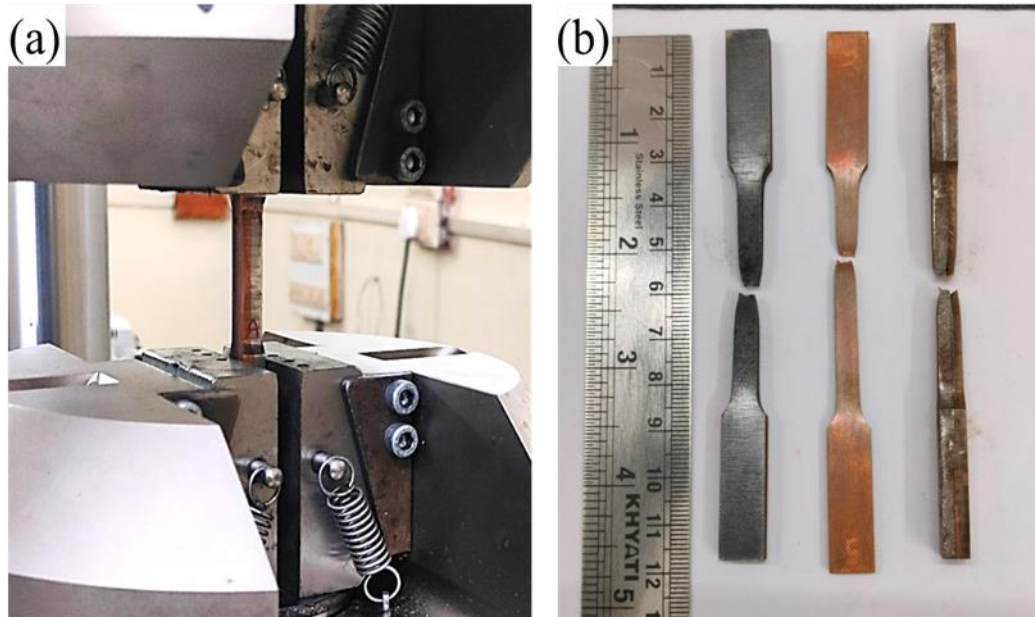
Demonstration of (a) necking phenomena in clad sample (b) fractured tensile samples
